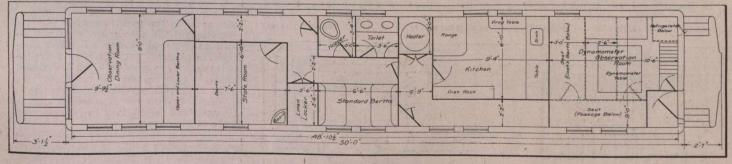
Floor Plan and Interior Arrangement of Dynamometer Car.
